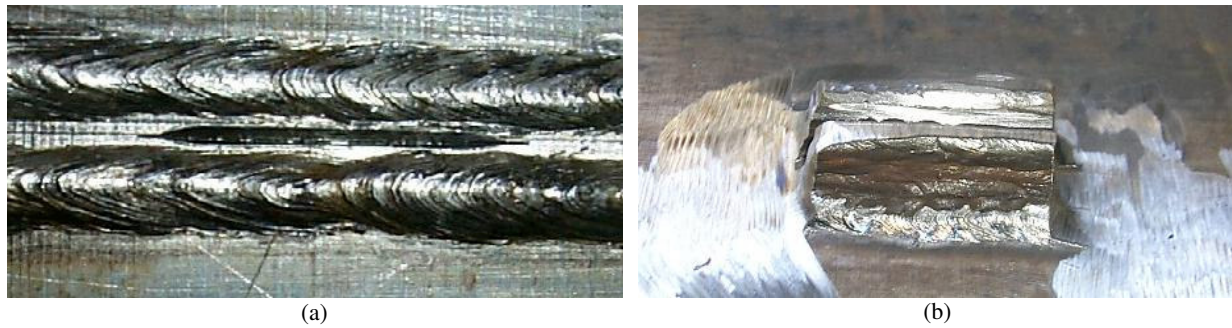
(a) notch and weld beads in the vessel wall, (b)- lateral view sight of the weld beads after machining.
